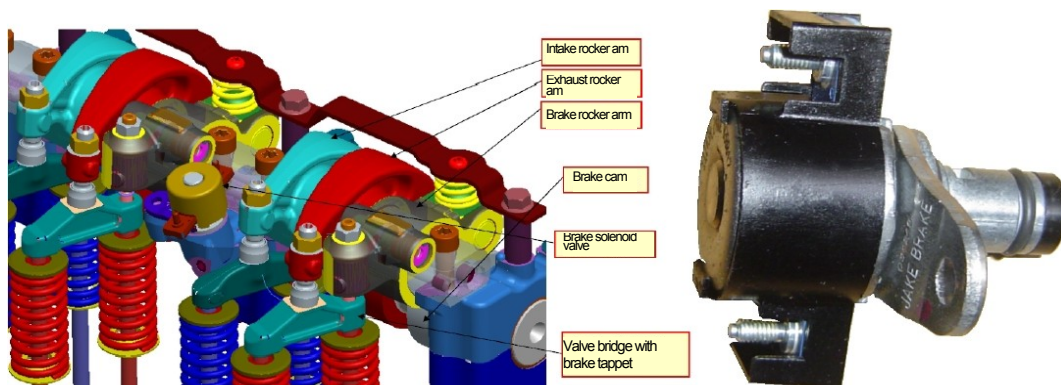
In-cylinder brake system structure and braking solenoid valve
